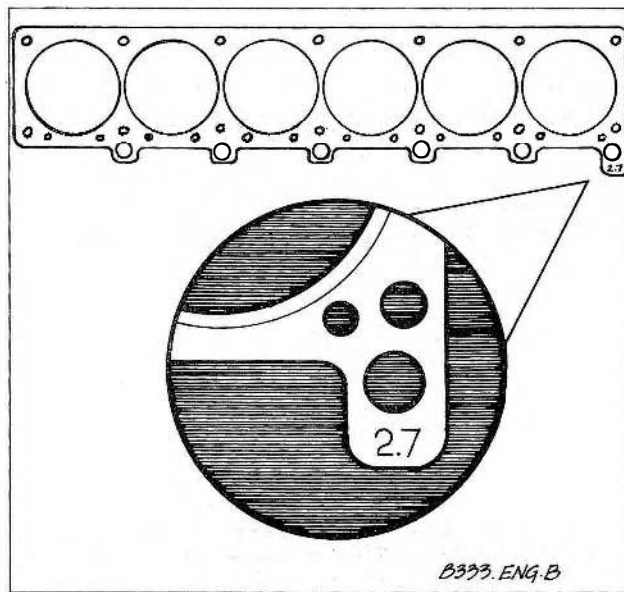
Engine displacement code stamp on cylinder head gasket flange.
